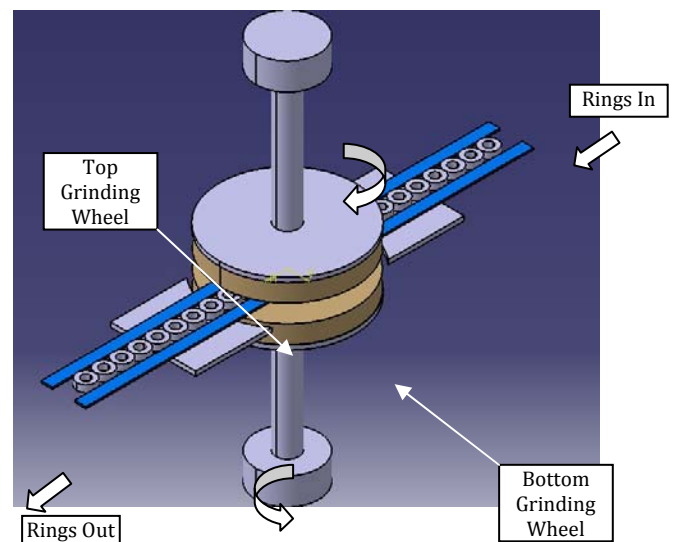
Bone Structure of DDS face grinding machine (Drawn in CATIA-V5)
